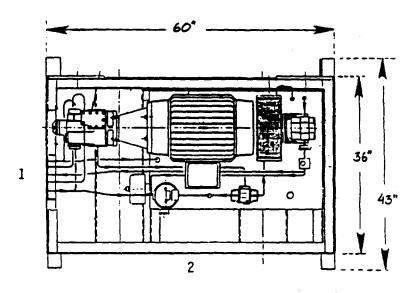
Hydraulic Power Package Plan View with Basic Dimensions
